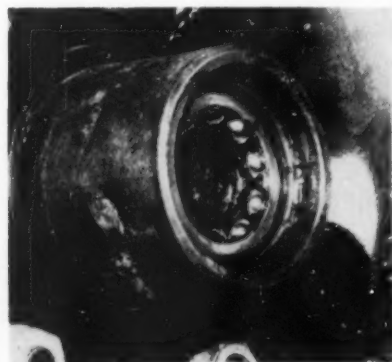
A—Outer Bearing of Passenger Car Front Wheel After 10,000 Miles.
